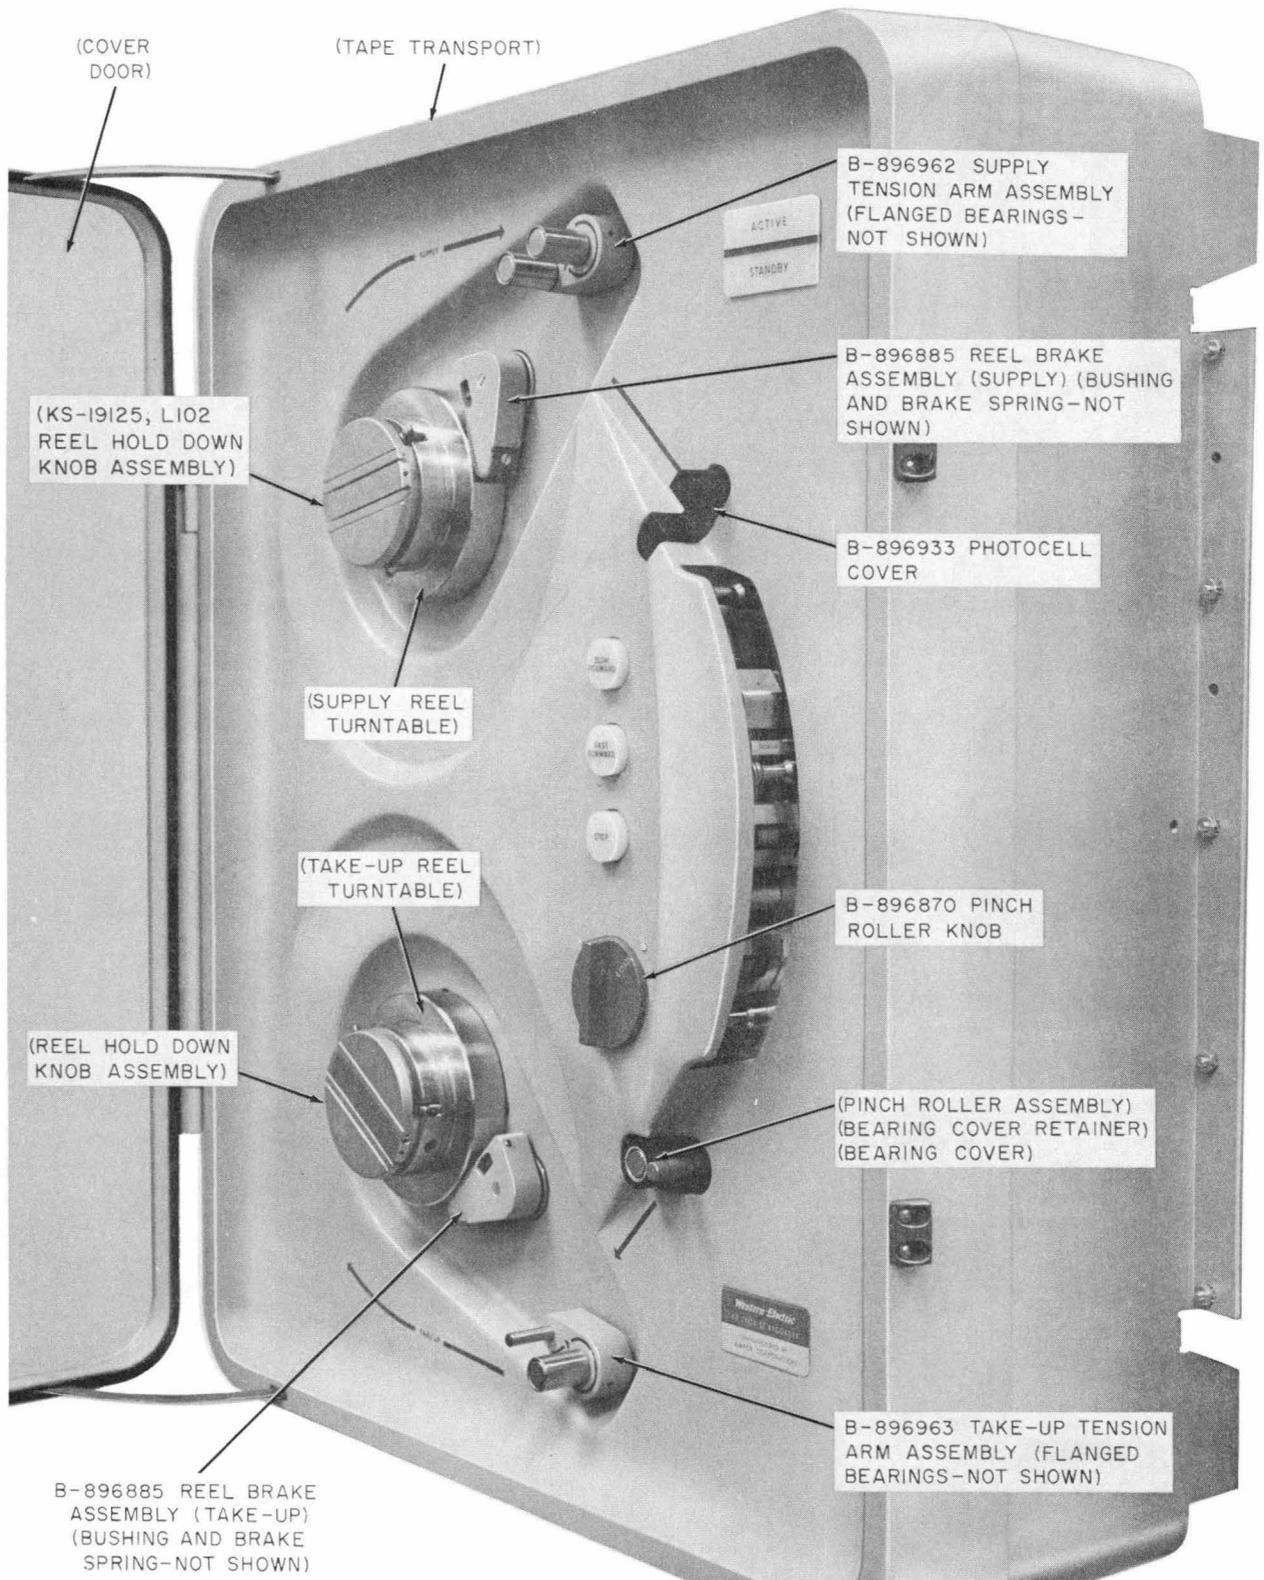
KS-19125, List 1 Recorder Assembly — Front View
